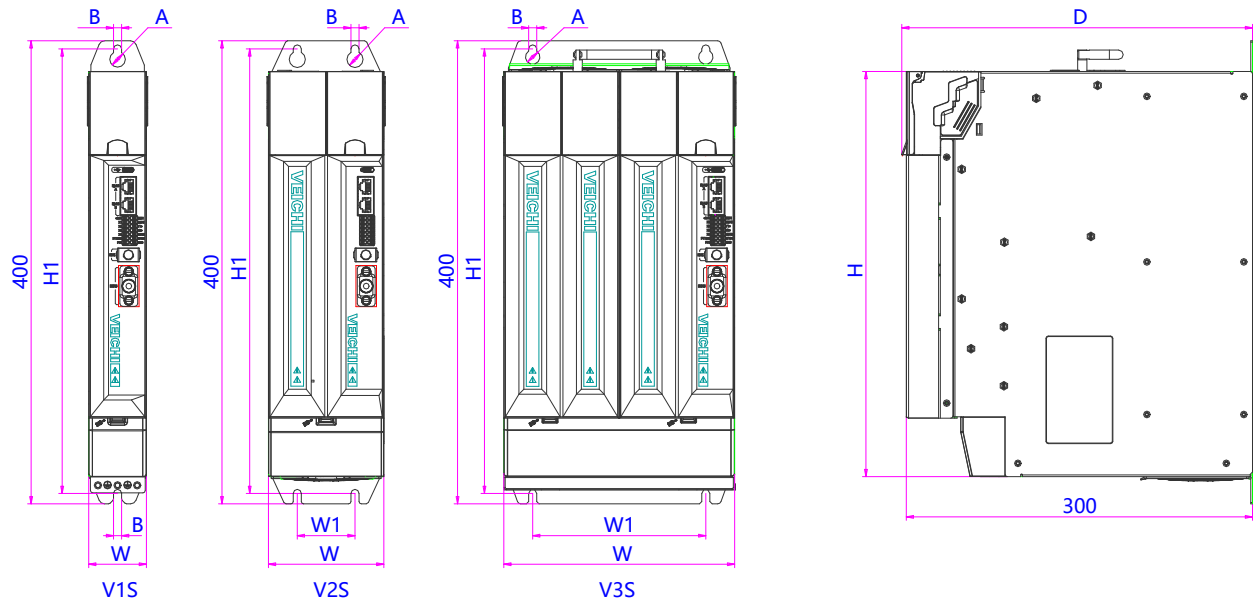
SD810 Servo Drive Inverter Module Dimension
